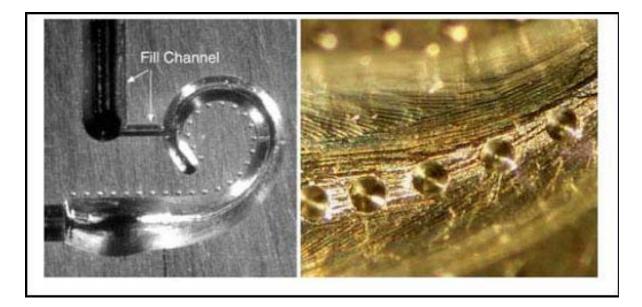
Mold cavities were machined in aluminum using computer controlled milling (left image). After receipt of the machined mold plates each plate was measured to verify dimensional accuracy and a series of dimples (150μ diameter, 150μ depth) were machined into the lower mold half to locate stimulating contacts during fabrication (right image). This series of dimples was located along the center line of the lower mold half to produce electrode sites facing upward toward the habenula perforata when inserted in the guinea pig scala tympani. Twenty-seven dimples were placed at 250μ intervals along the length of the mold cavity. We plan to place additional dimples along the modiolar surface of the mold and along the centerline of the upper mold half. The striations visible on the mold surface in the higher magnification view on the right are the machining marks left from the CNC milling operation using a ball end mill.
